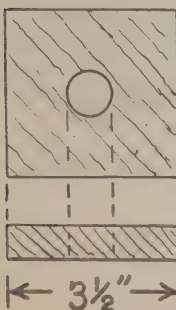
## DETAIL OF CONSTRUCTION OF LAMP CONTACT DISKS
